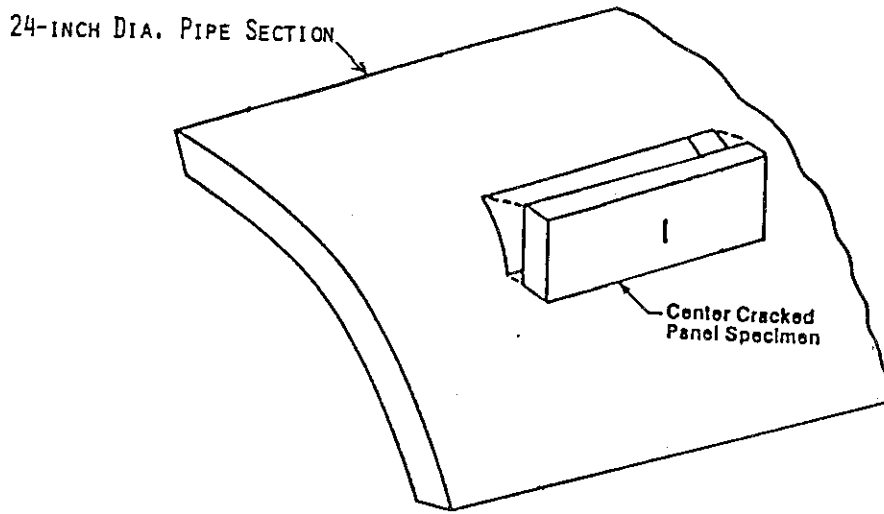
Schematic drawing of center cracked panel specimen orientation used for unstable fracture test
